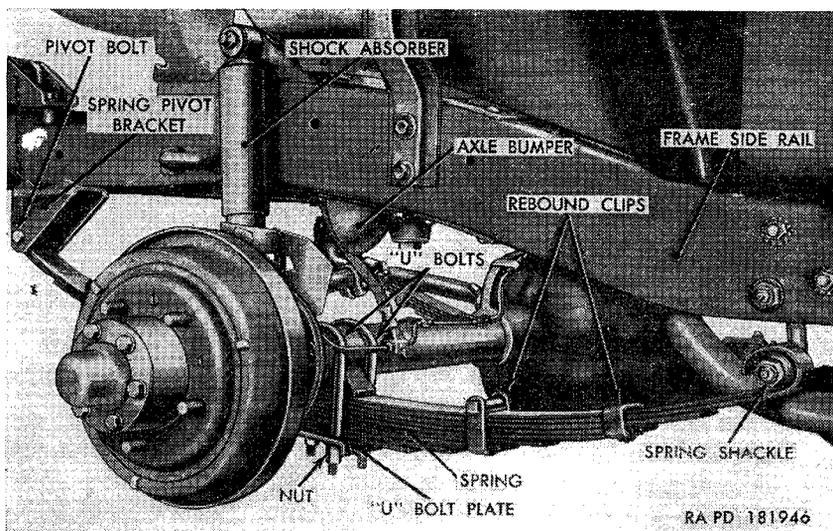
Front spring assembly and shock absorber—installed—wheel removed.
